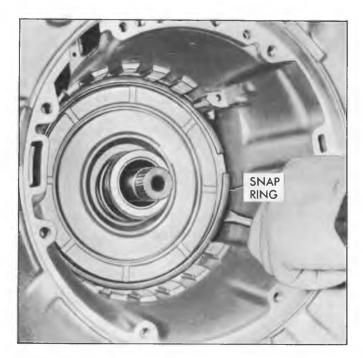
T-Removing Center Support to Case Retaining Snap Ring
